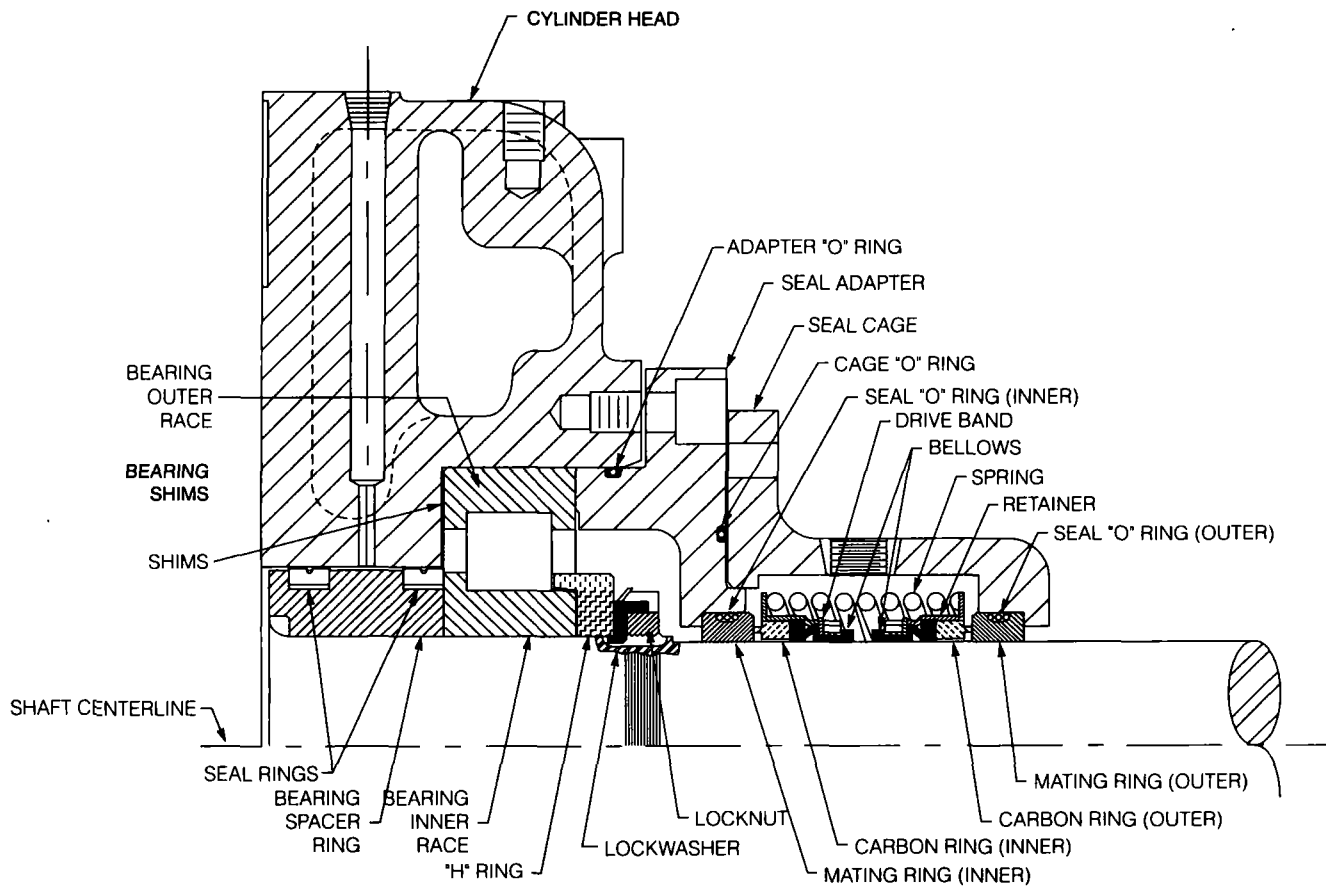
FIXED ROTOR FLOAT, H-RING AND DOUBLE BELLOWS SEAL INSTALLED
